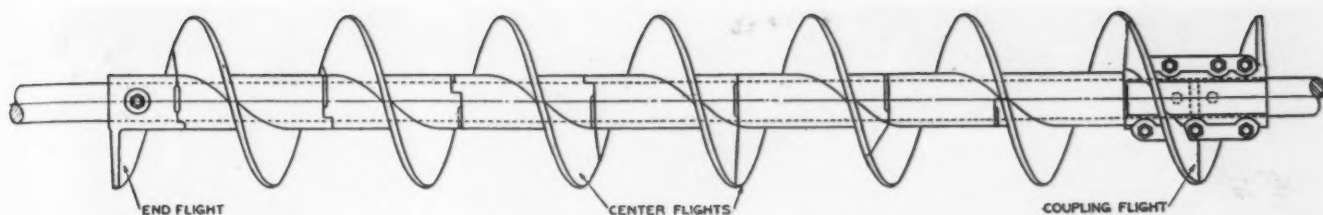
Section of cast iron screw conveyor, as used for handling abrasive materials. Courtesy of Jeffrey Mfg. Co.
